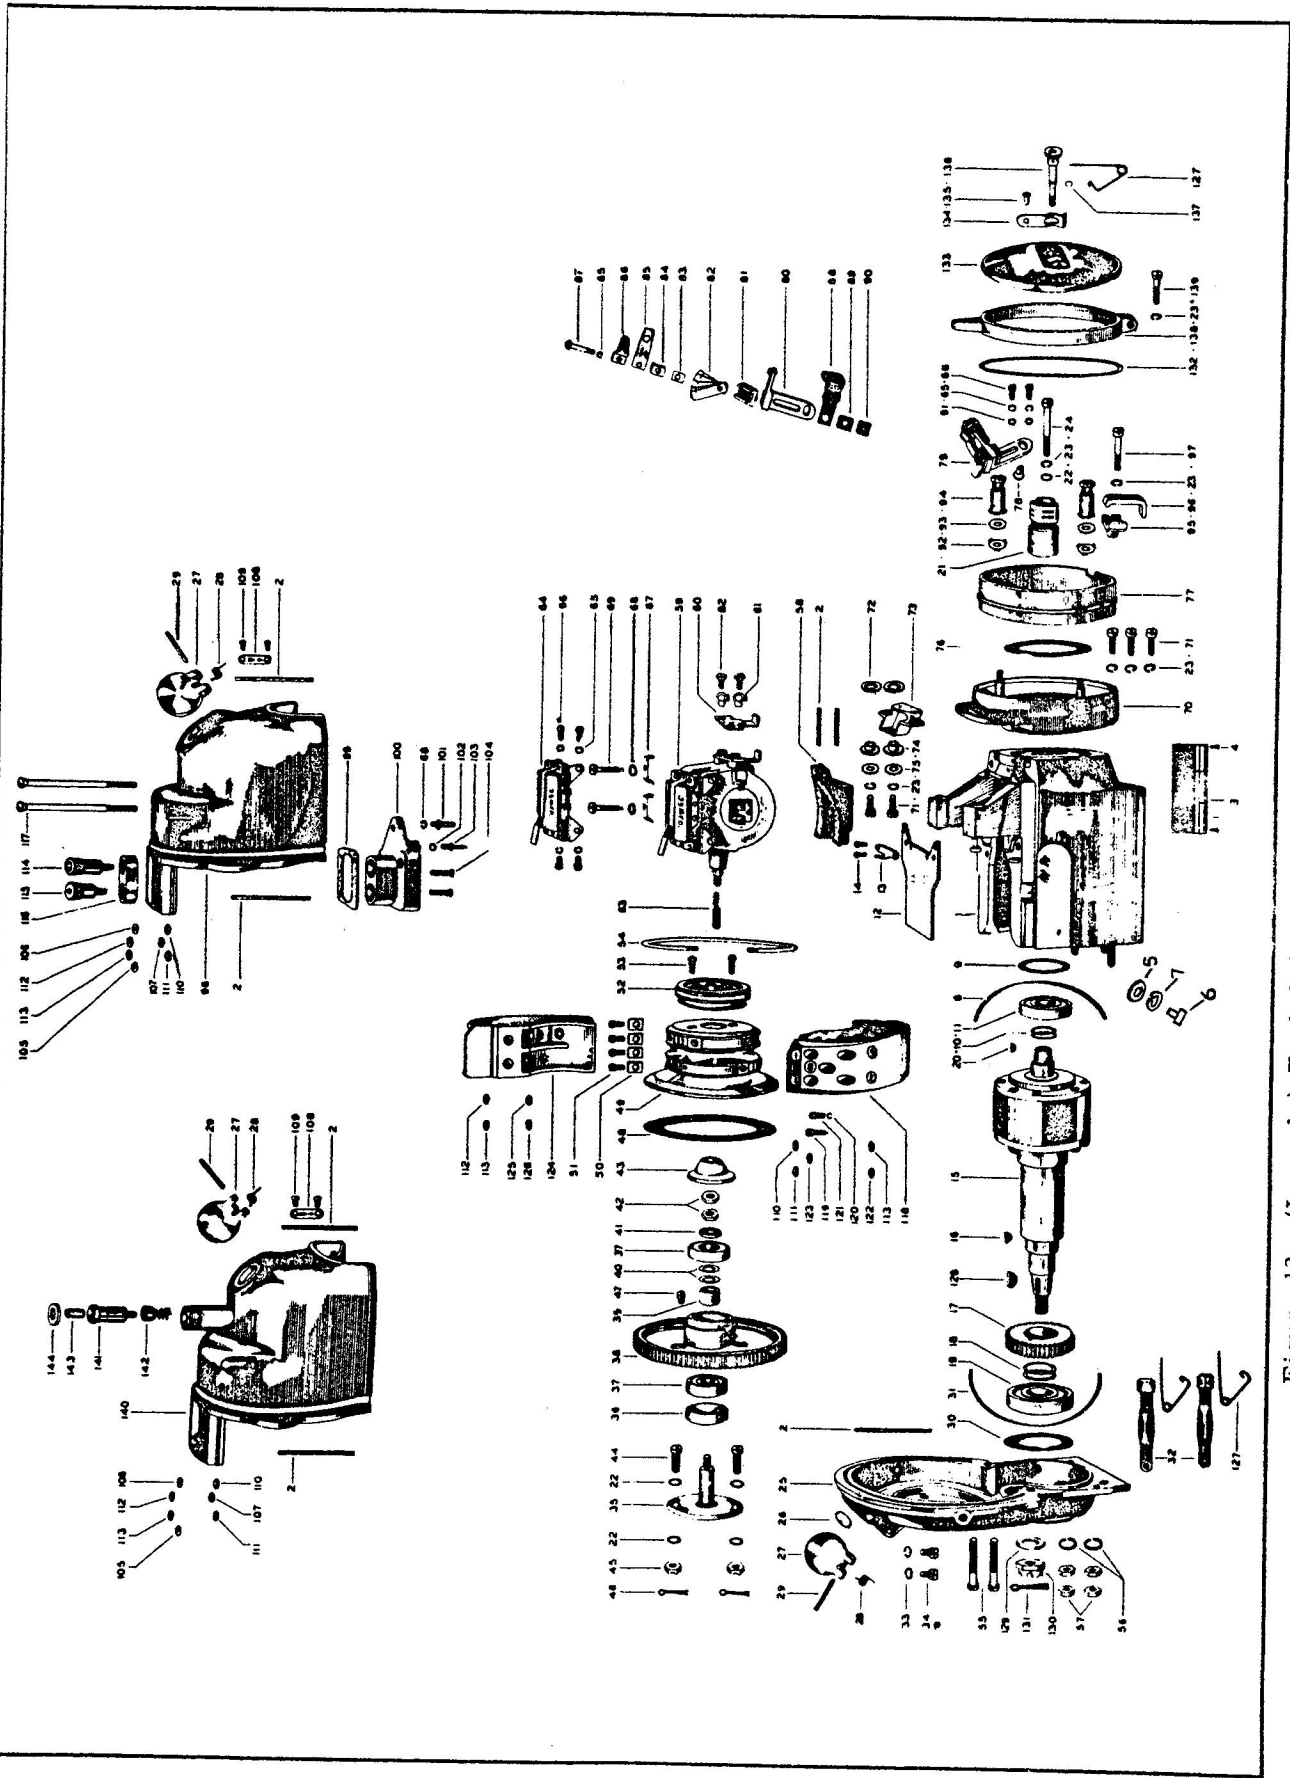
(Issue 1.) Exploded View of Detailed Parts—SB9RN Magneto
